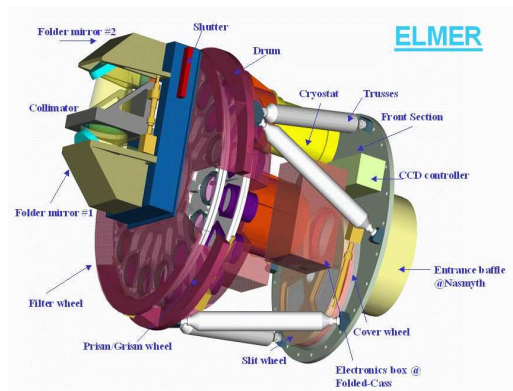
Drawing of ELMER showing the main parts and the compact design.
